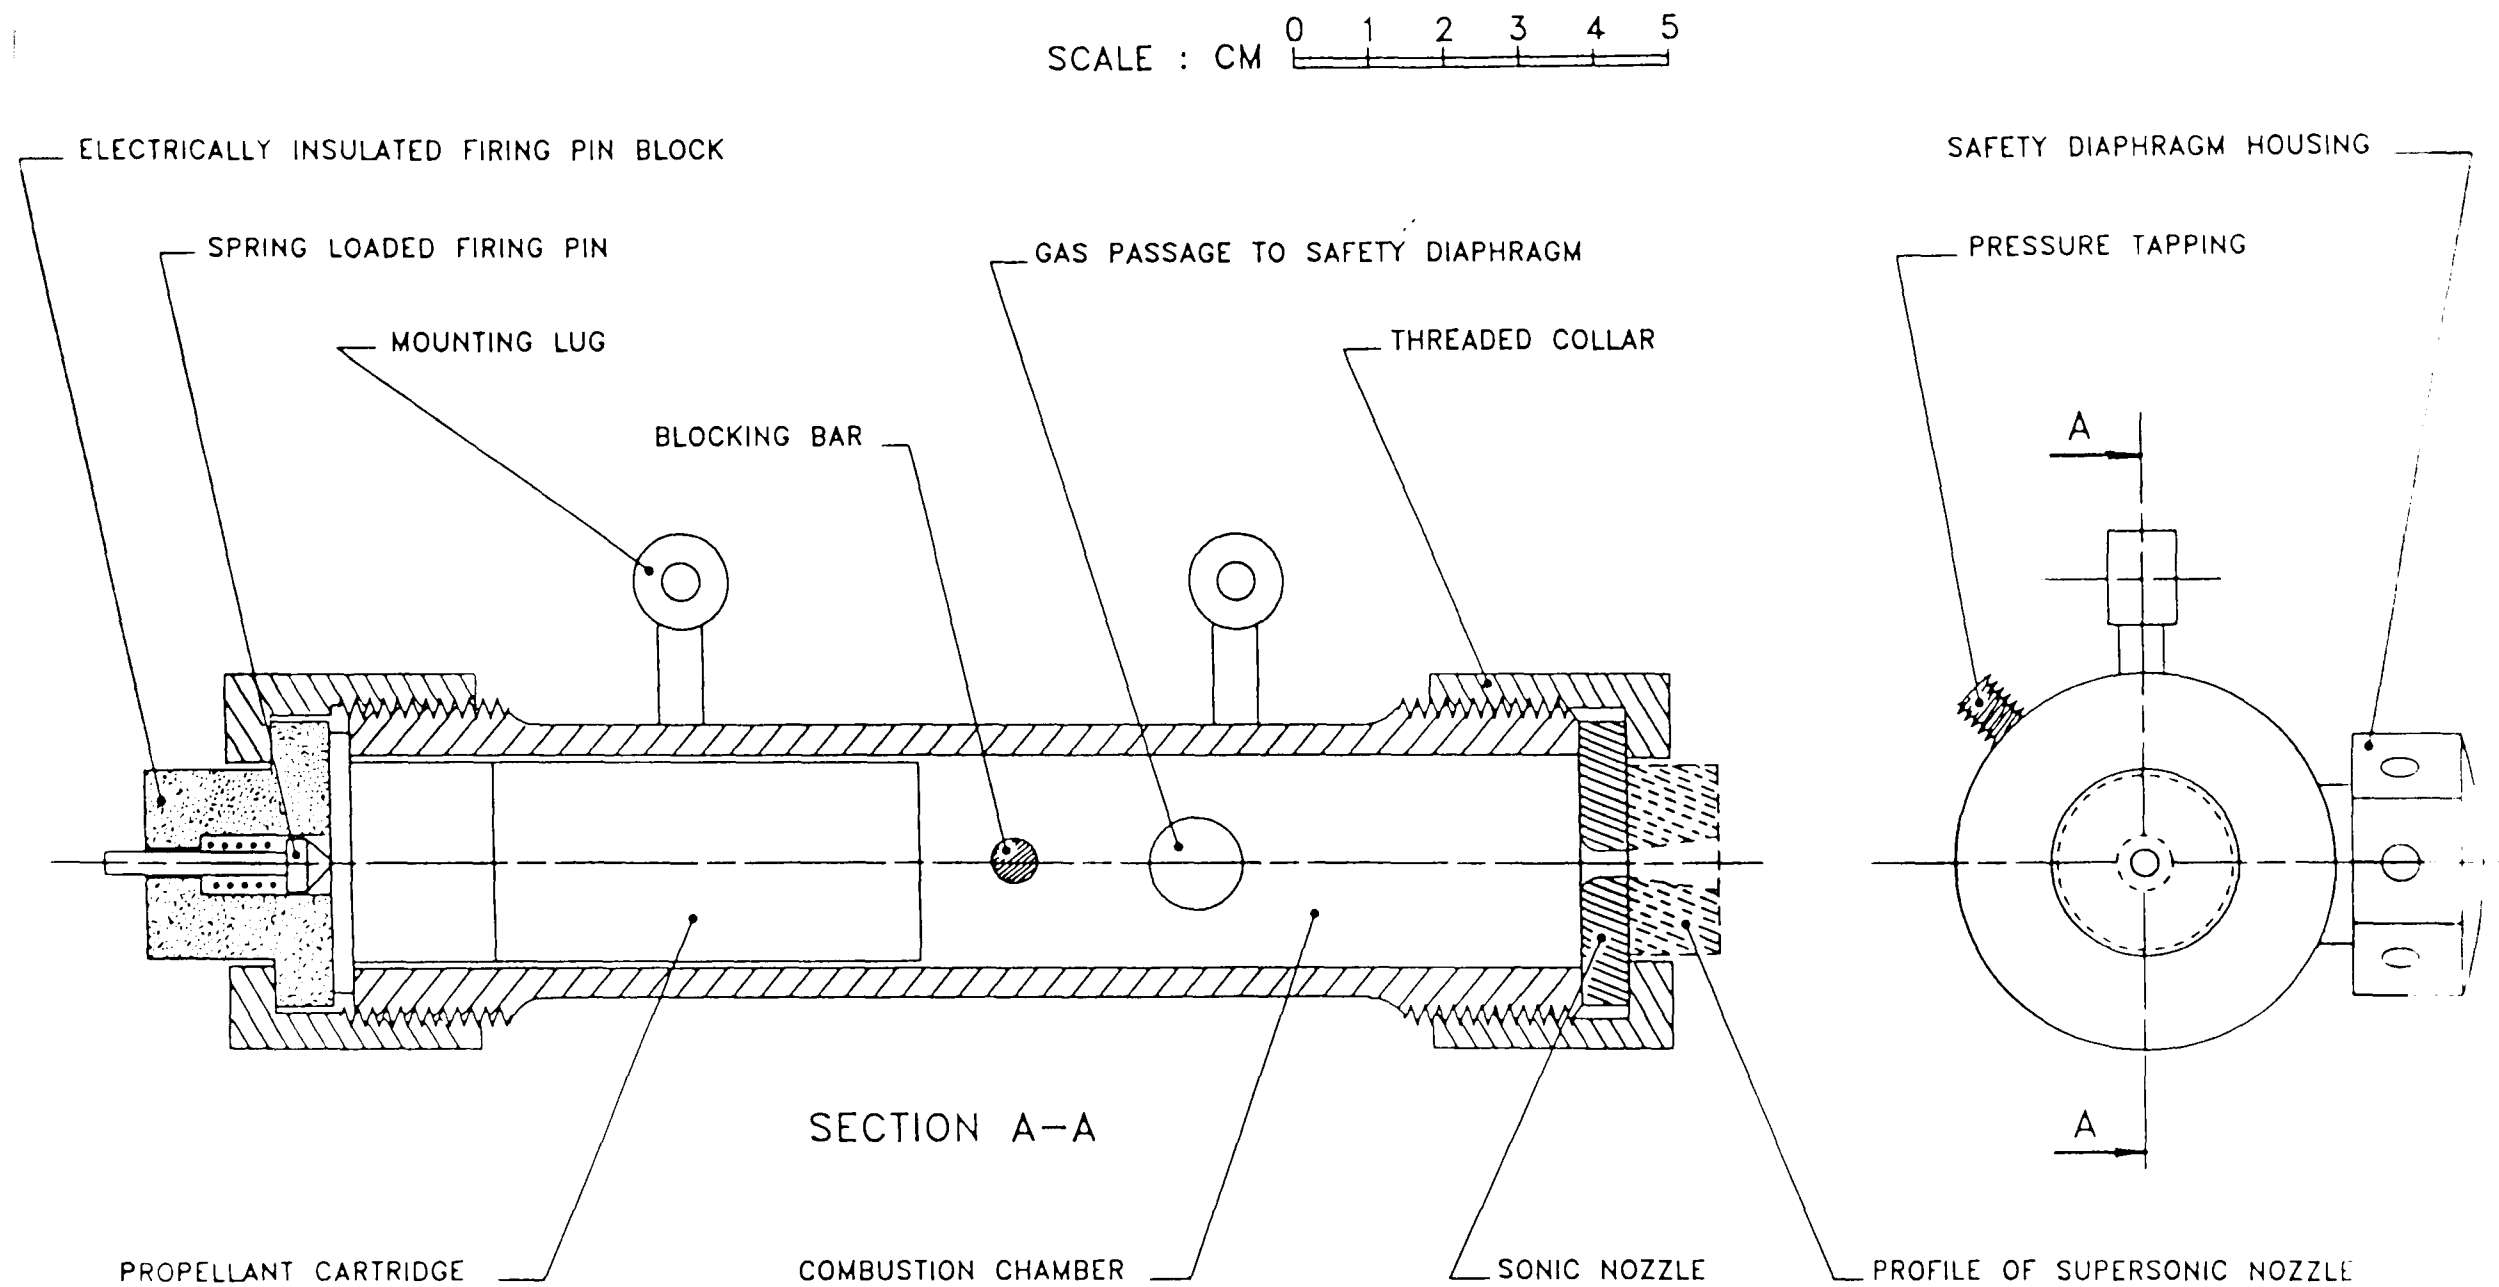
SECTIONED DRAWING OF THE HILTON SOLID PROPELLANT ROCKET MOTOR
